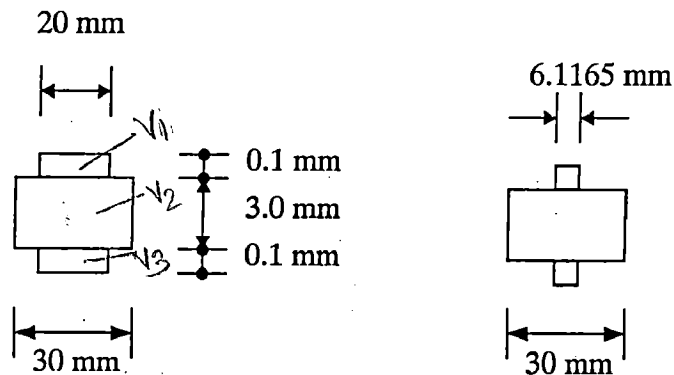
Transformed Section of Beam with Piezo-Patches
